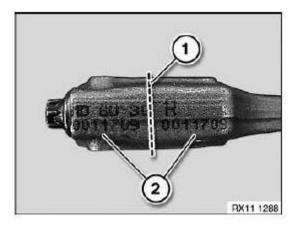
Identifying Connecting Rod Point Of Fracture And Pairing Letters Courtesy of BMW OF NORTH AMERICA, INC.
